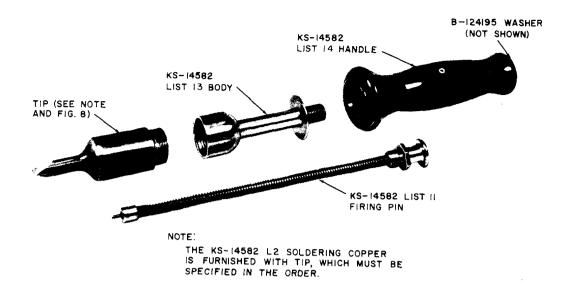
KS-14582, L2, Soldering Copper-Showing Components
